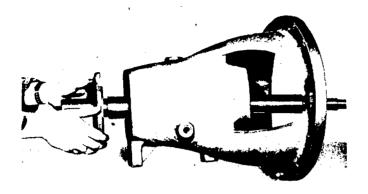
Mounting of bearing cover Push thrower (507) over the shaft up to just before the bearing cover.
